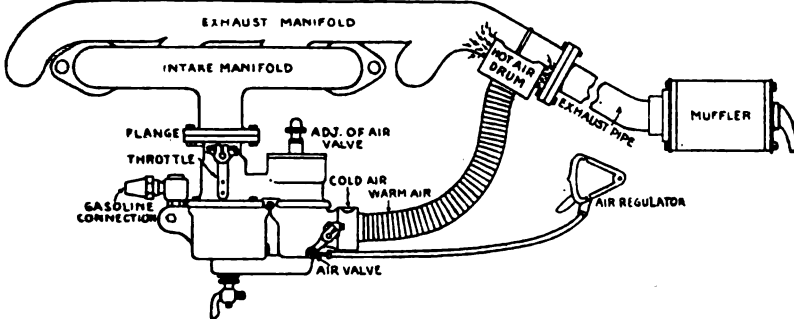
Showing how warm air is drawn into carburetor. Also how "choker" or air valve cuts off the air supply causing gasoline to be drawn into cylinder.
